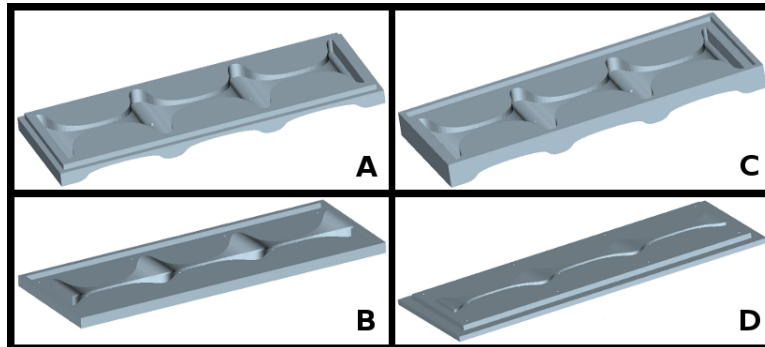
CAD Drawings of Mold that was 3D Printed to Create Prototype from DragonSkin™ (A: Top Half of Mold for Top Section of Prototype; B: Bottom Half of Mold for Top Section of Prototype; C: Top Half of Mold for Bottom Section of Prototype; D: Bottom Half of Mold for Bottom Section of Prototype)
